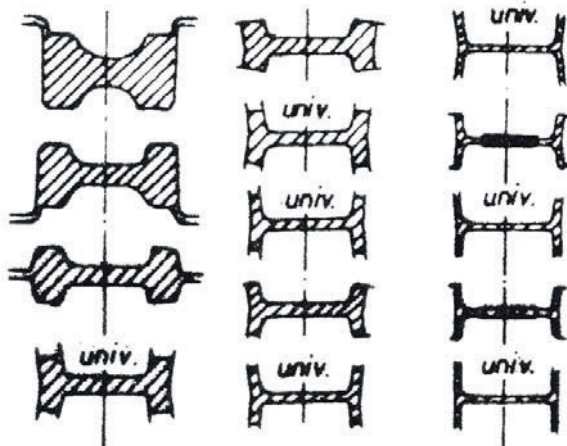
Typical 14-passes roll pass design for rolling parallel flanged I-beams [3]
